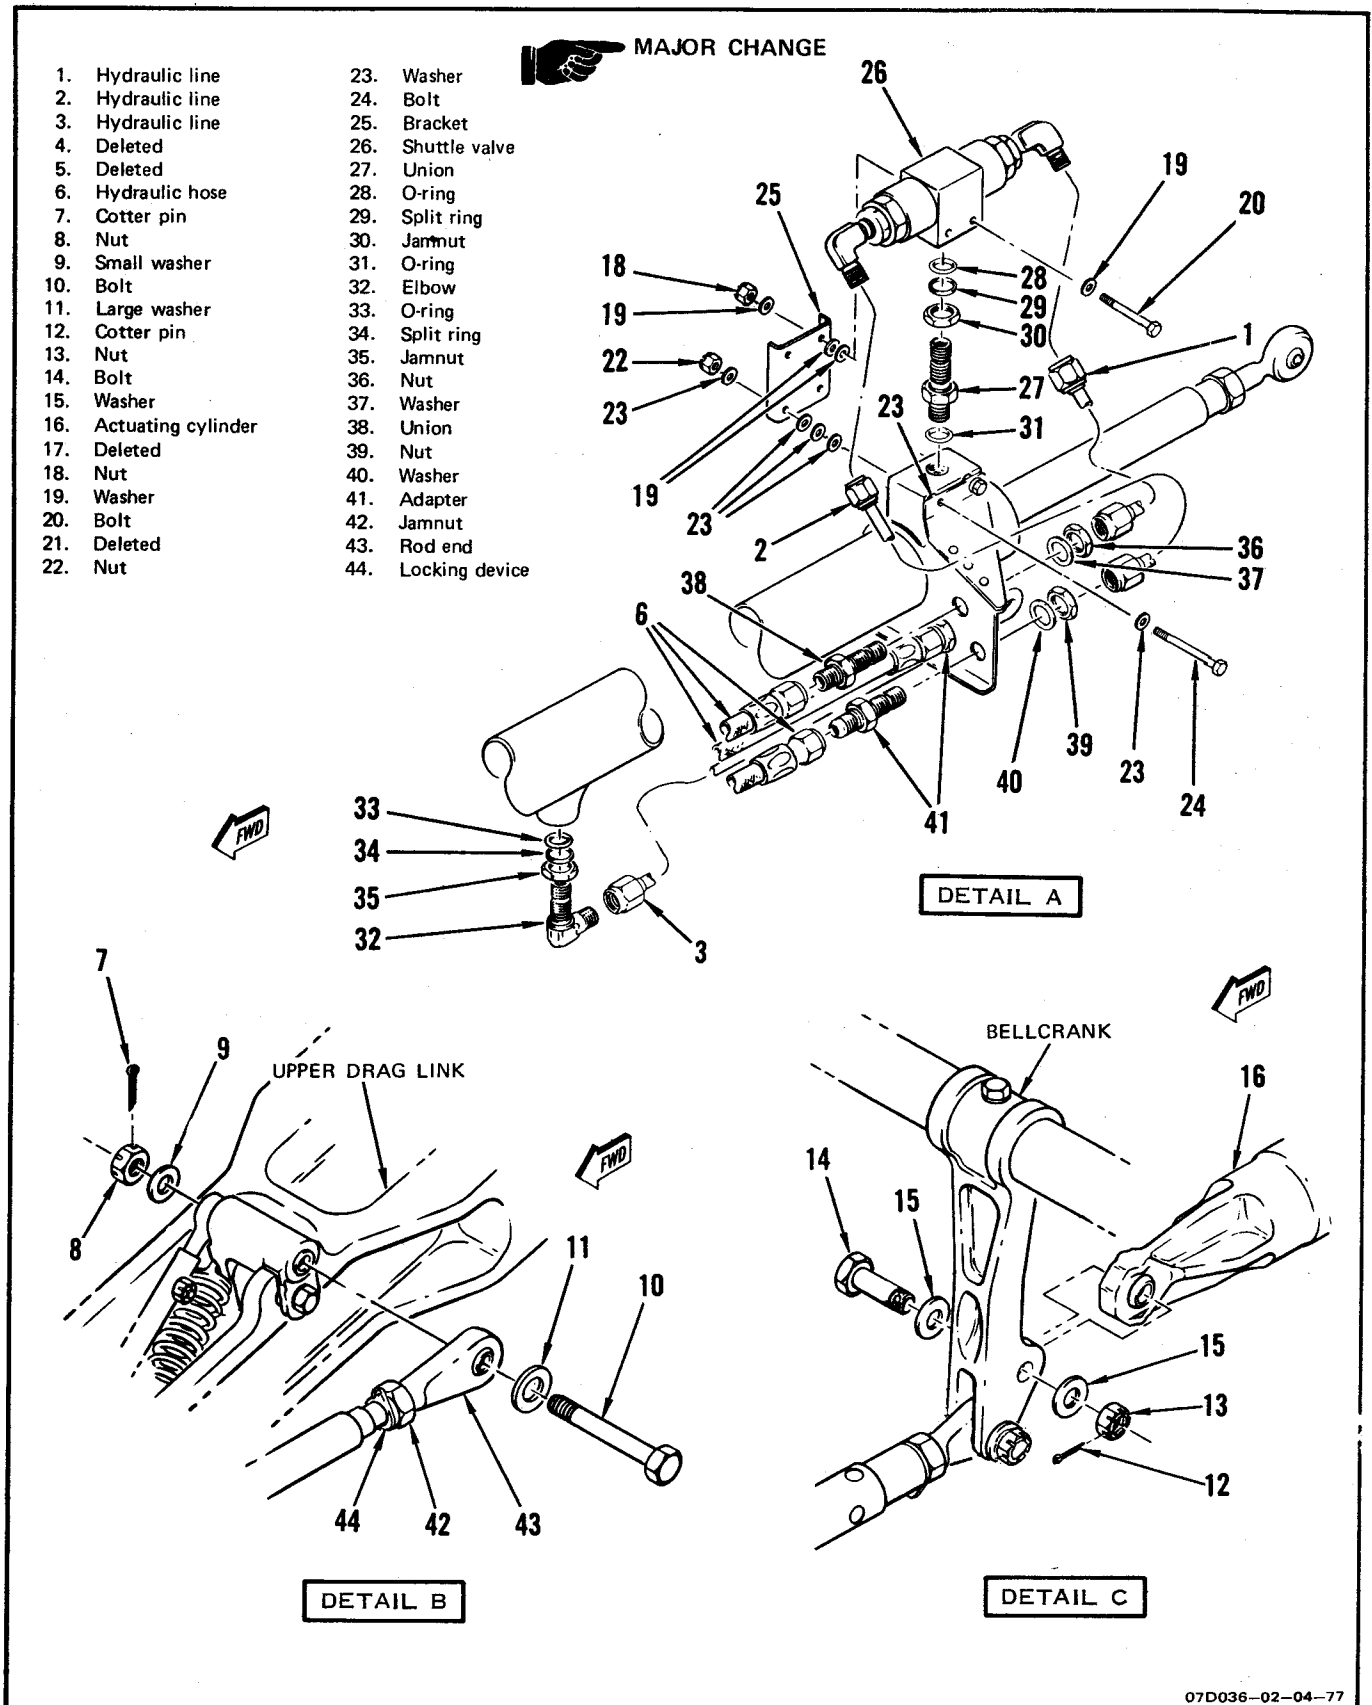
Nose Gear Actuating Cylinder Removal and Installation (Sheet 2)
